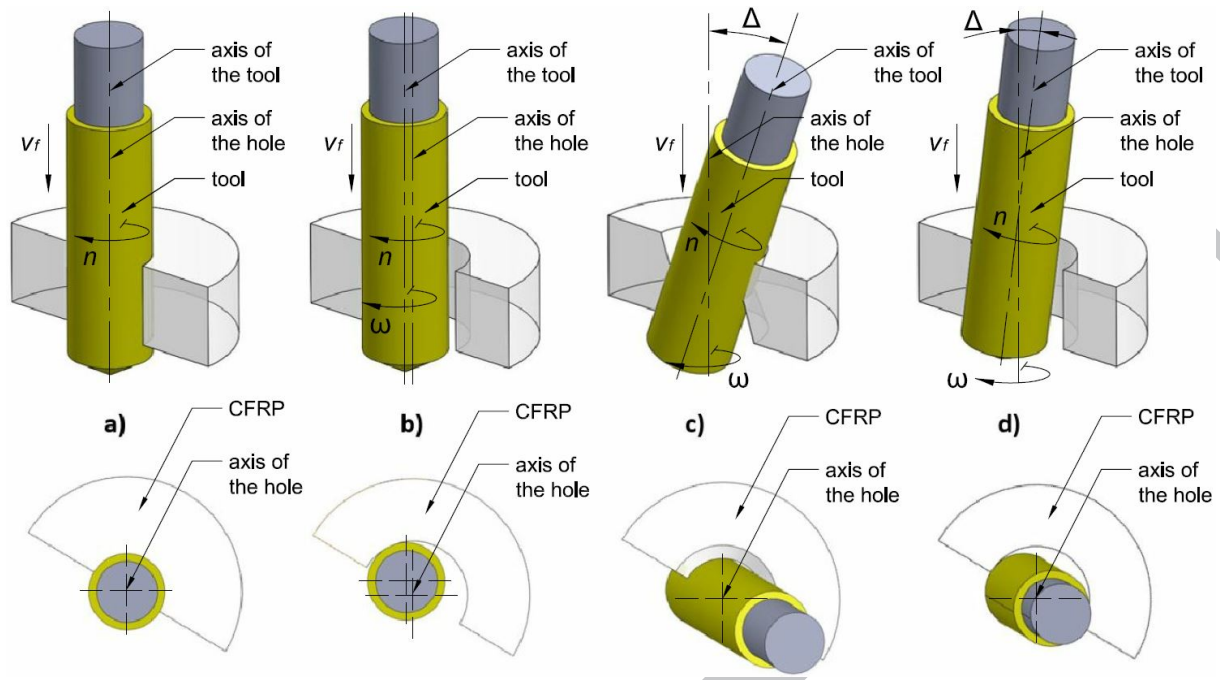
Schematic drawings of mechanical drilling technologies: (a) conventional drilling, (b) conventional helical milling (orbital drilling), (c) wobble milling and (d) tilted helical milling. In the figure, v_f is the feed rate, n is the spindle speed and ω is the wobbling speed
